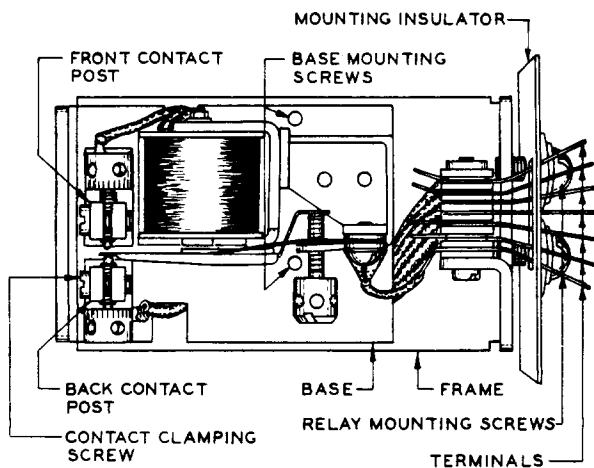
Top View — 267-type, D-99739, and D-175787 Relays
